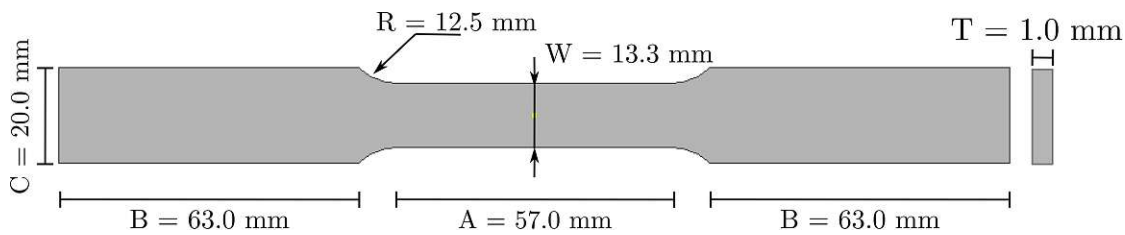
Detailed dimensions of an ASTM flat steel sample.
